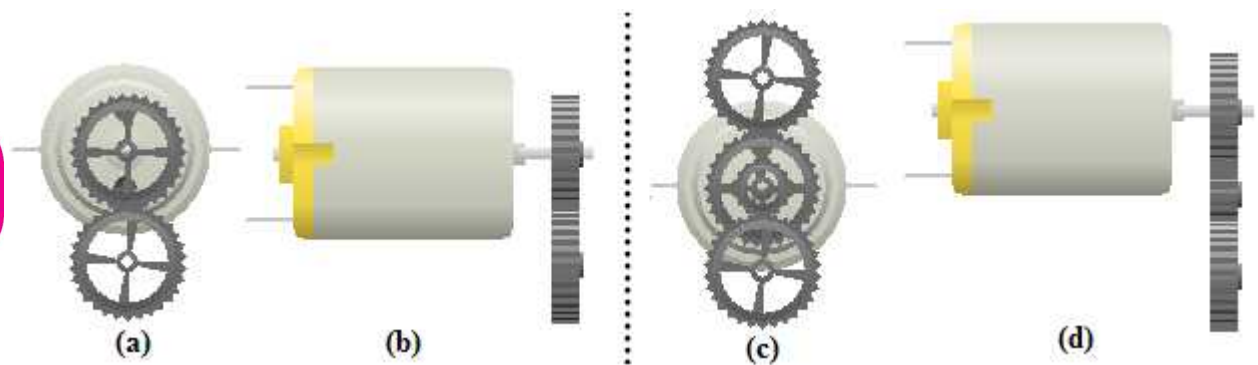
Small DC motor with gears; (a) Simple gear train plan view, (b) Simple gear train side view, (c) Compound gear train plan view, (d) Compound gear train side view
